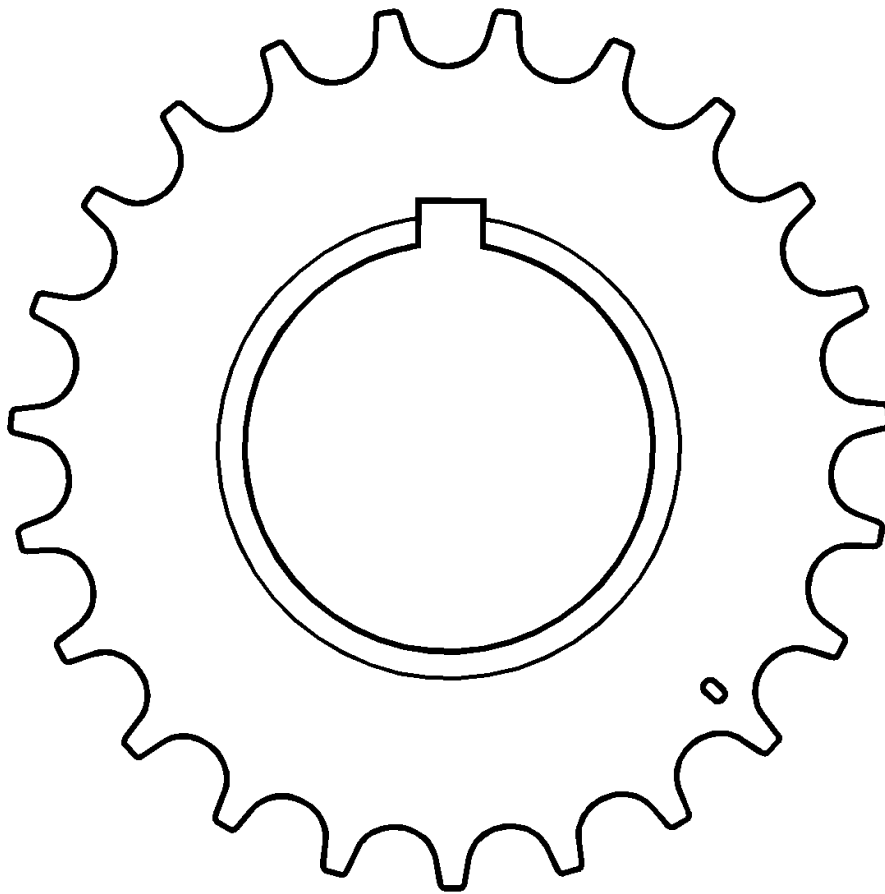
View Of Crankshaft Sprocket Timing Mark
